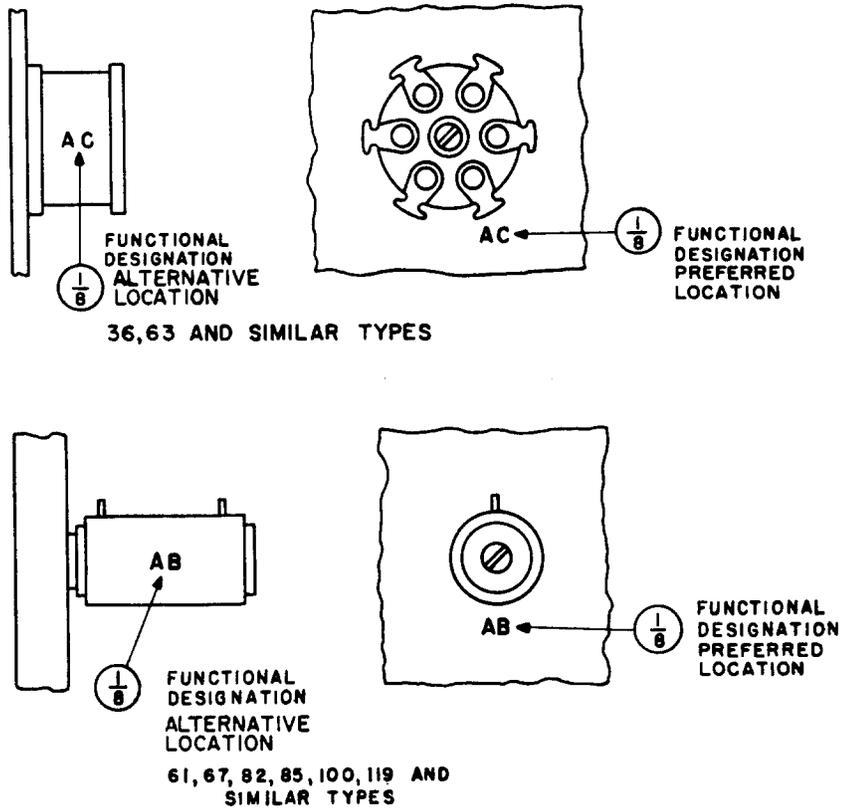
Resistors — 36 and Similar Types — See Table C (Stamp on Side Where Designation Will Be Most Easily Observed)
